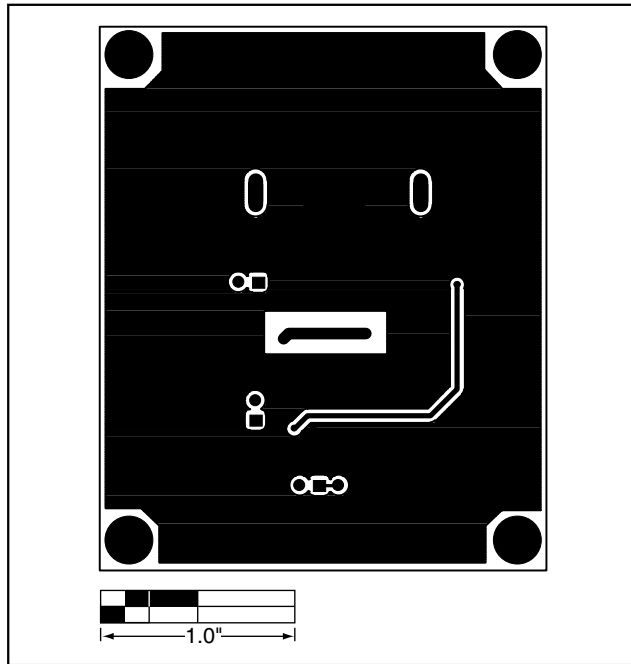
MAX1644 EV Kit PC Board Layout—Solder Side
